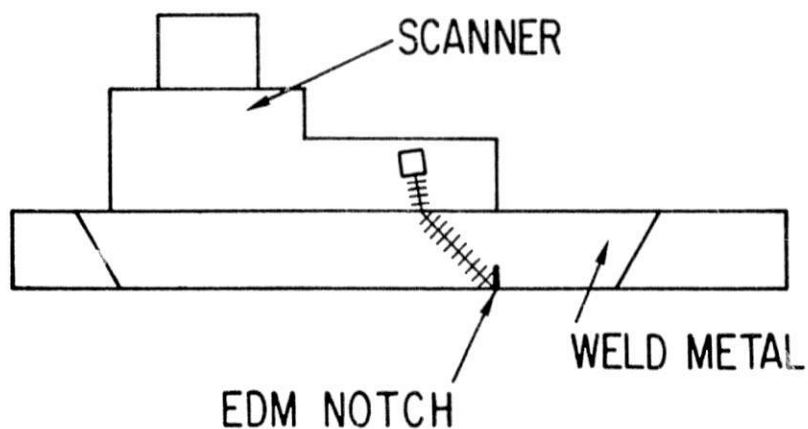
Arrangement of Scanner and Specimen for Detection of Weld-metal Notch. The scanner generated 45° longitudinal waves in the weld metal. Neg. No. MSD 65551.
